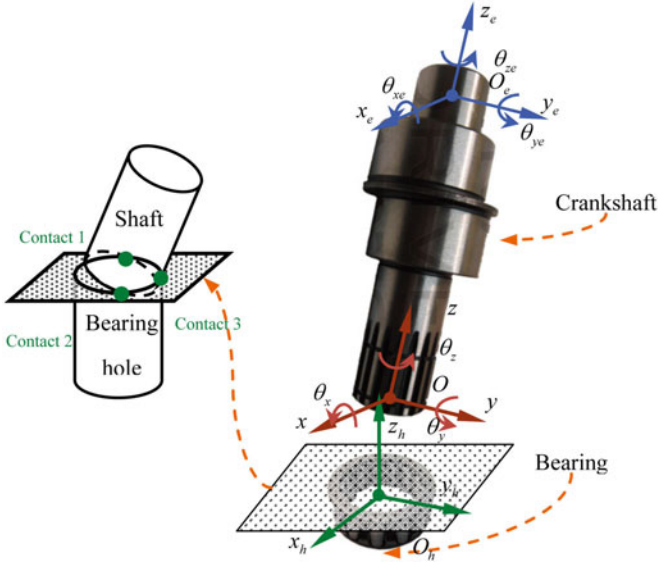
Crankshaft-bearing insertion and the built coordinate frames based on three different base points, including the center of bearing hole, the bottom, and the top end of crankshaft. The left figure denotes the stable state with three points contacted between the crankshaft and bearing.
